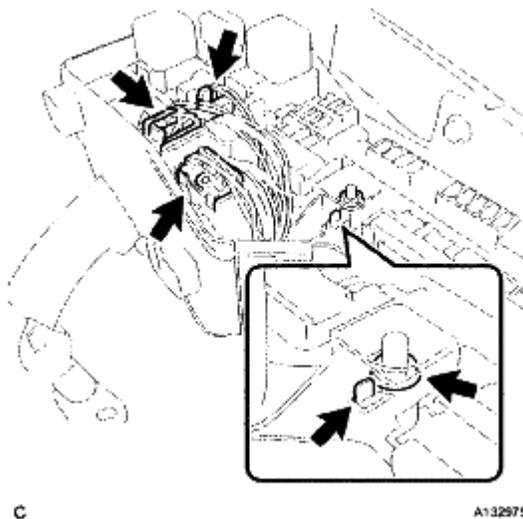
Locating Engine Wire And Engine Room Relay Block
